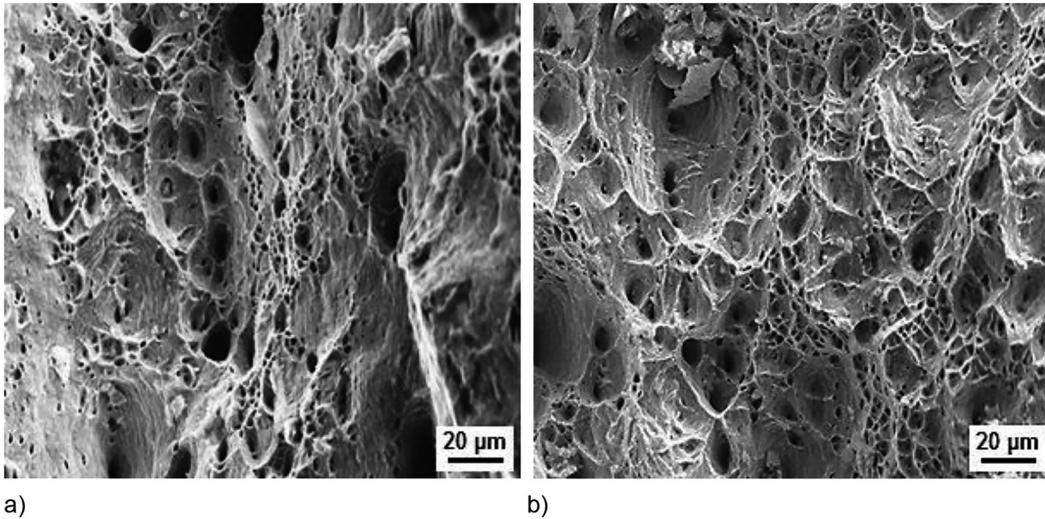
The fatigue fracture surface of samples, a) S1, b) S5.
